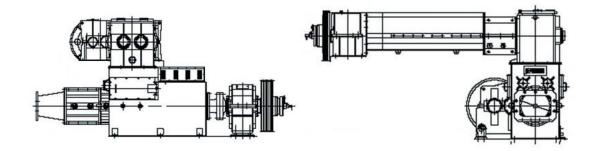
Vacuum extruder type TL-CXJ-FII56-45
